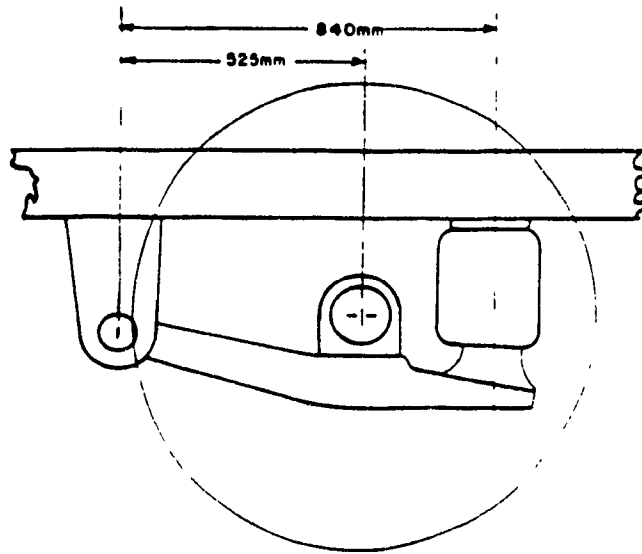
Schematic of rolling sleeve-type pneumatic spring [6].
